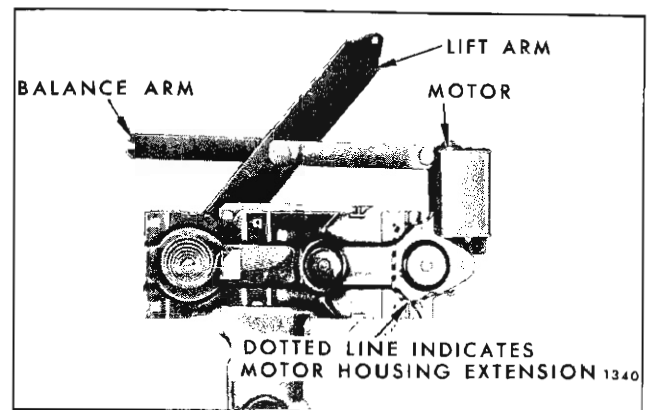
D42—Door Window Regulator and Electric Motor Assembly
